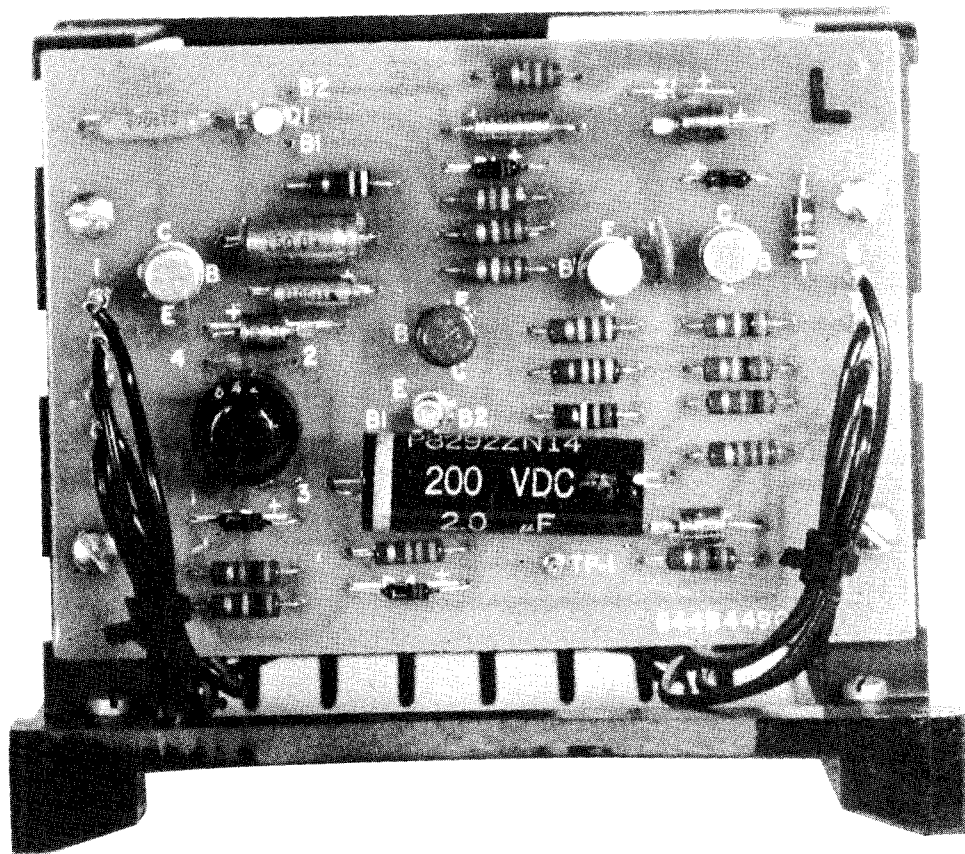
Type SGR-51 Reclosing Relay (Rear View).
